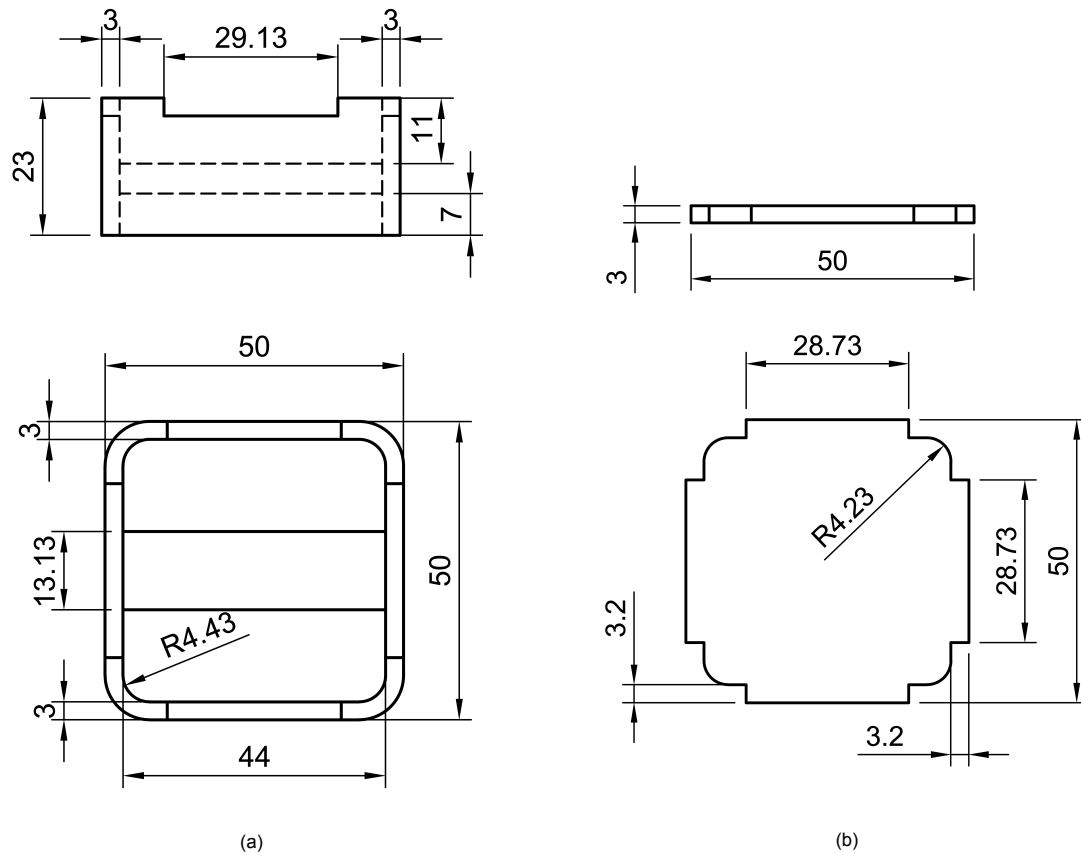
Drawing of side- and top-view of all parts regarding the joint connector. (a) The dimensions of the base of the joint connector. (b) The dimensions of the lid of the joint connector.
